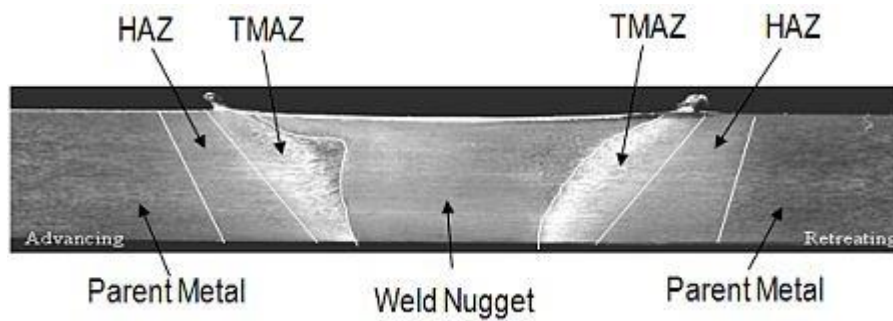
Example of a typical weld zones in a FSW steel
